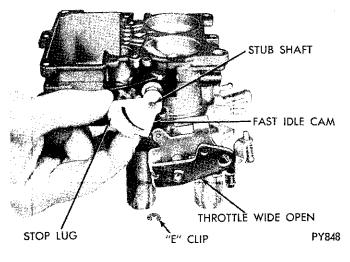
Removing or Installing Fast Idle Cam INSPECTION AND REASSEMBLY
